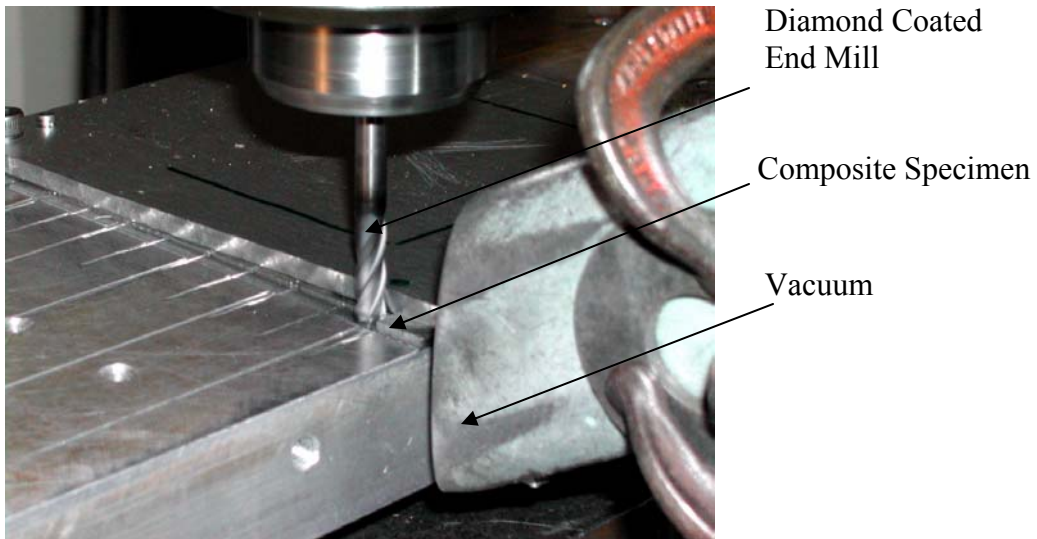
Machining of the edges of carbon fiber composite specimen.
